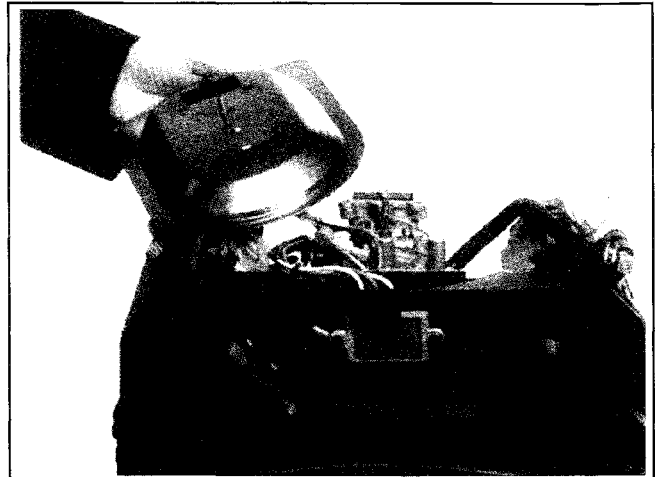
Removing Base on Standard Type Air Cleaner.
